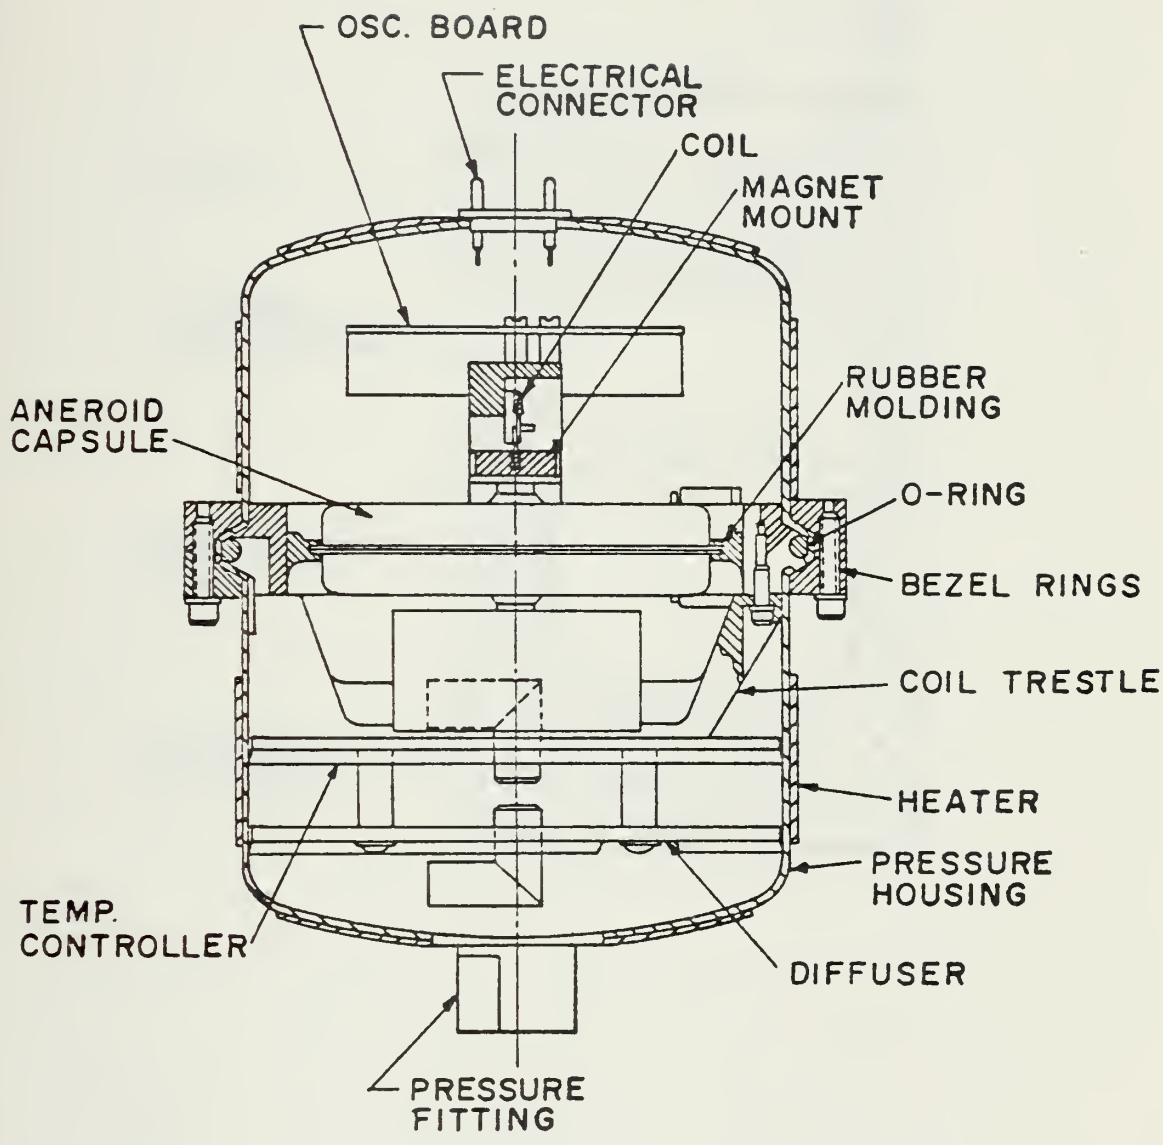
TRANSDUCER MECHANICAL DESIGN DETAILS
